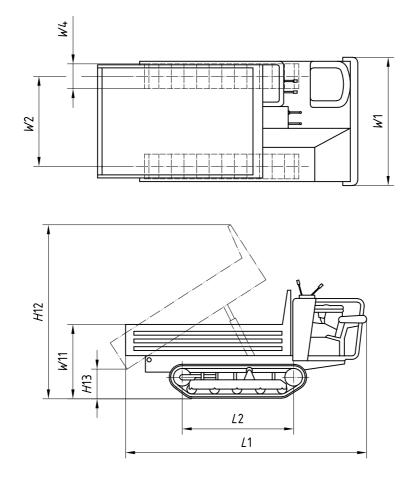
Dimensions of crawler compact dumper — Rear operator position
